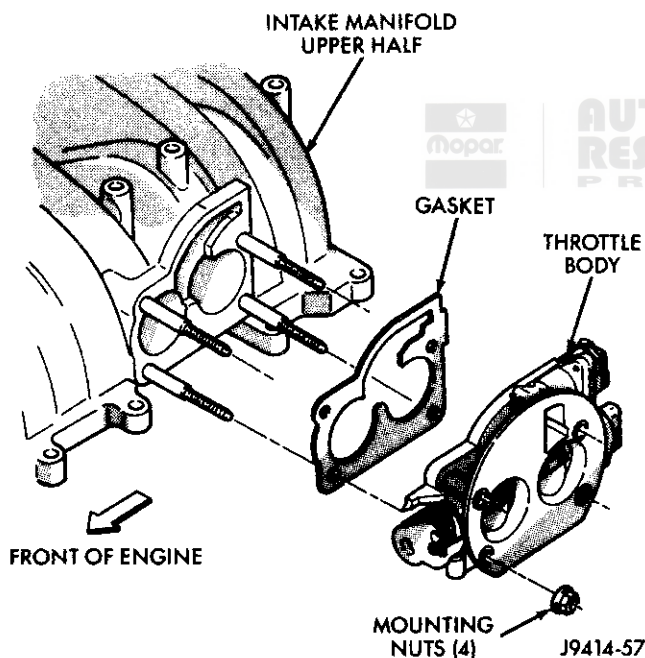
Throttle Body Mounting Nuts—8.0L Engine
